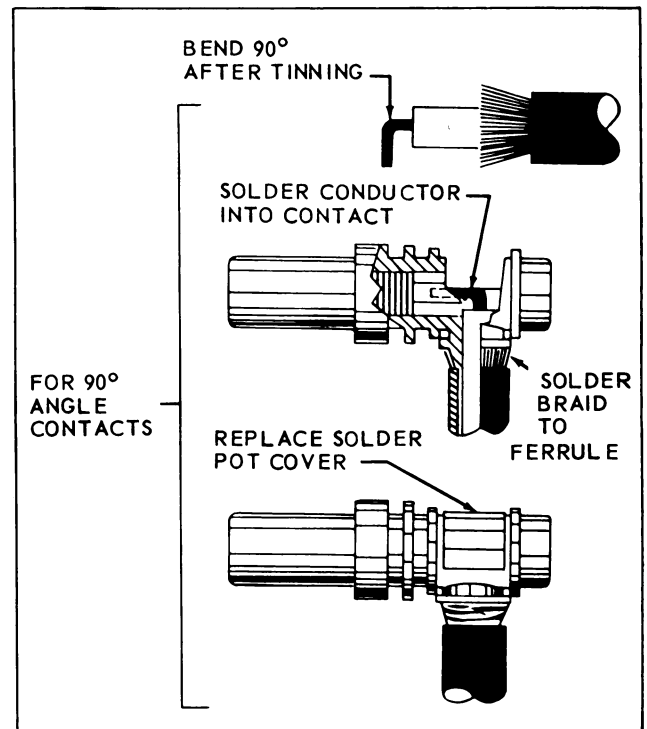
(2) Soldering Coaxial Cable to Contacts for DPD Connector
